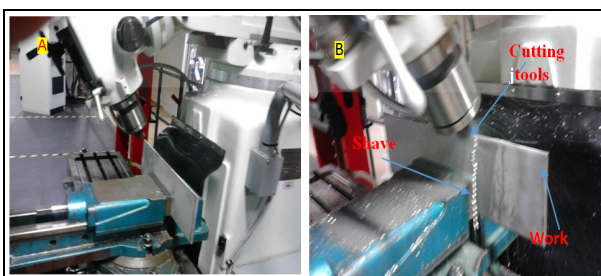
V-groove setup on Universal Milling Machine (a) setup (b) during the cutting
